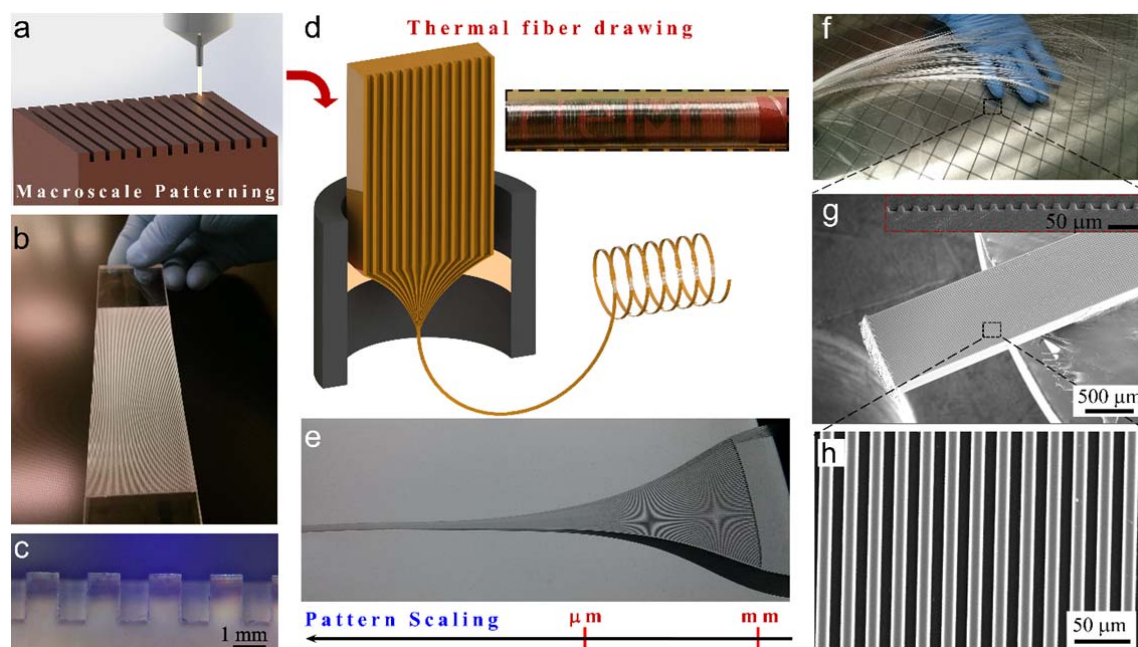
Fiber Surface Patterning. Fiber drawing technique meets macropatterning technologies. (a) Conventional macroscale tools, including milling, laser cutting and molding, are able to process materials at the preform level. (b) Image of a PMMA preform patterned by a laser. (c) Microscope image of the cross section of a PMMA preform patterned by a 1 mm diameter end mill. (d) Thermal fiber drawing reduces the size of the preform as well as the surface patterns. Inset shows several meters of patterned flexible fiber rolled onto a pencil. (e) Preform neck obtained after fiber drawing illustrates dimensional scaling of the process. (f) Continuous strands of patterned fiber are displayed. (g) SEM image of a surface-patterned fiber. Inset represents the cross section of the same fiber. (h) Zoomed-in SEM image of the gratings on the fiber surface.
